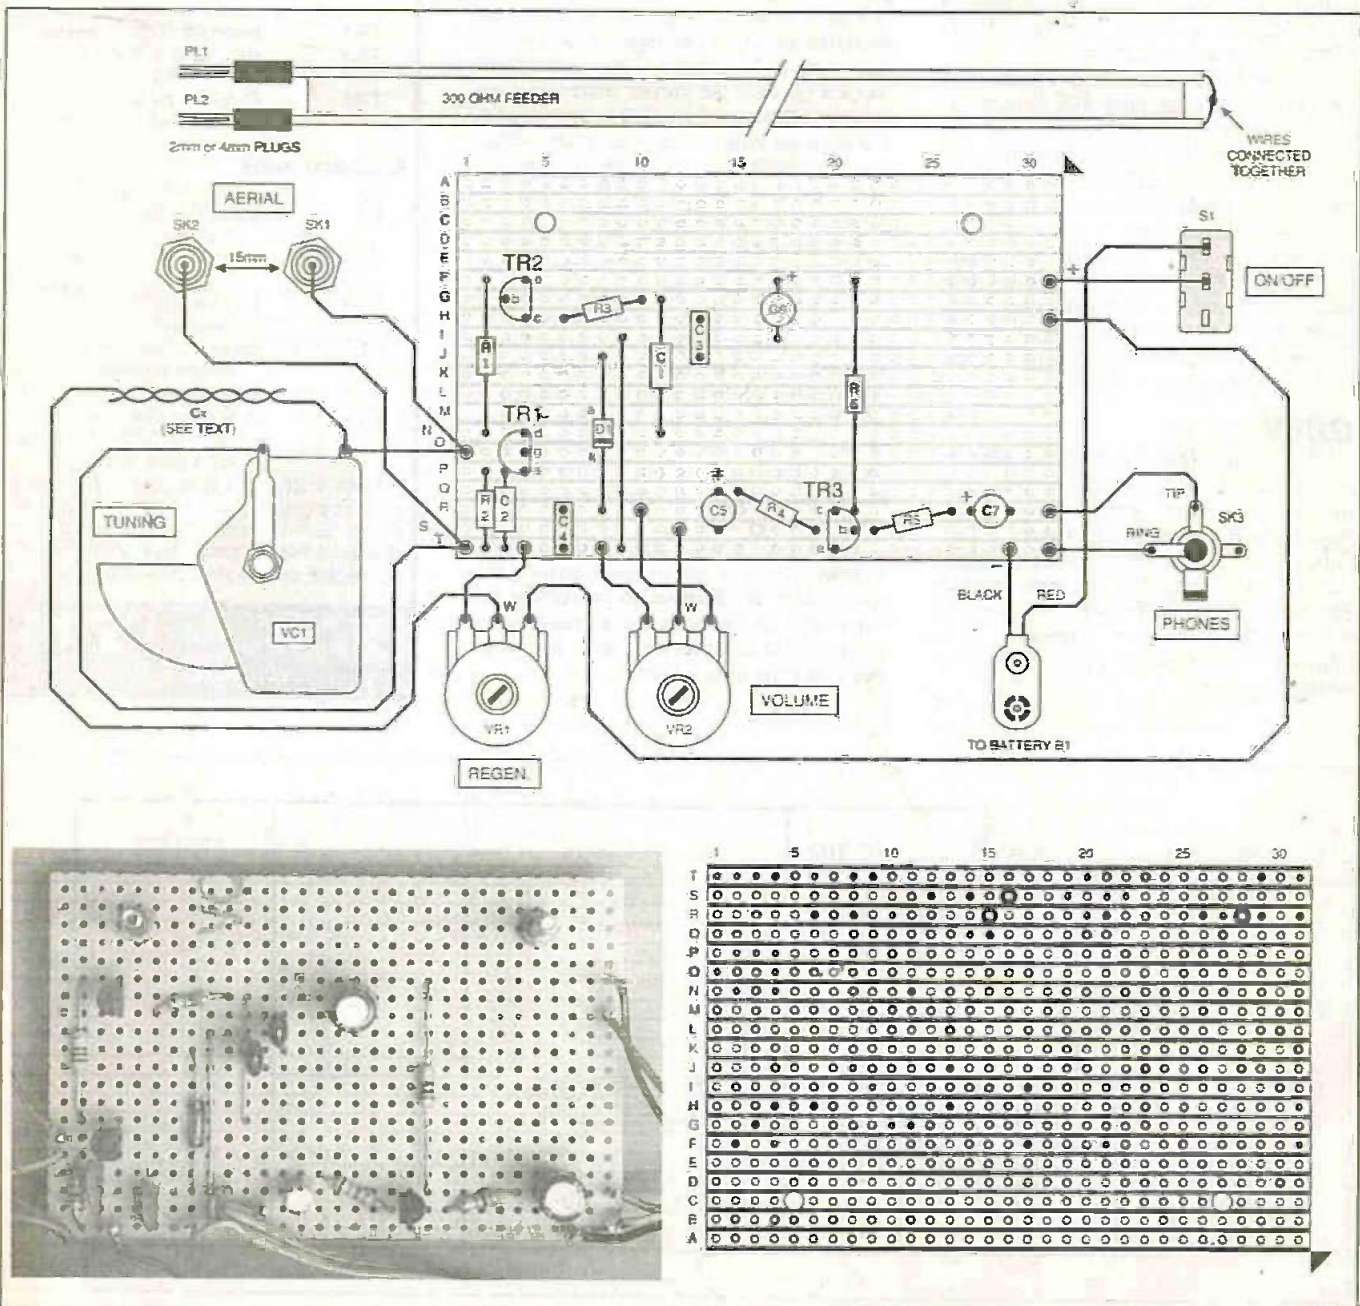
Stripboard component layout, off-board interwiring and board underside showing breaks in copper tracks. "Loop" aerial details are shown at the top and the completed board above.
